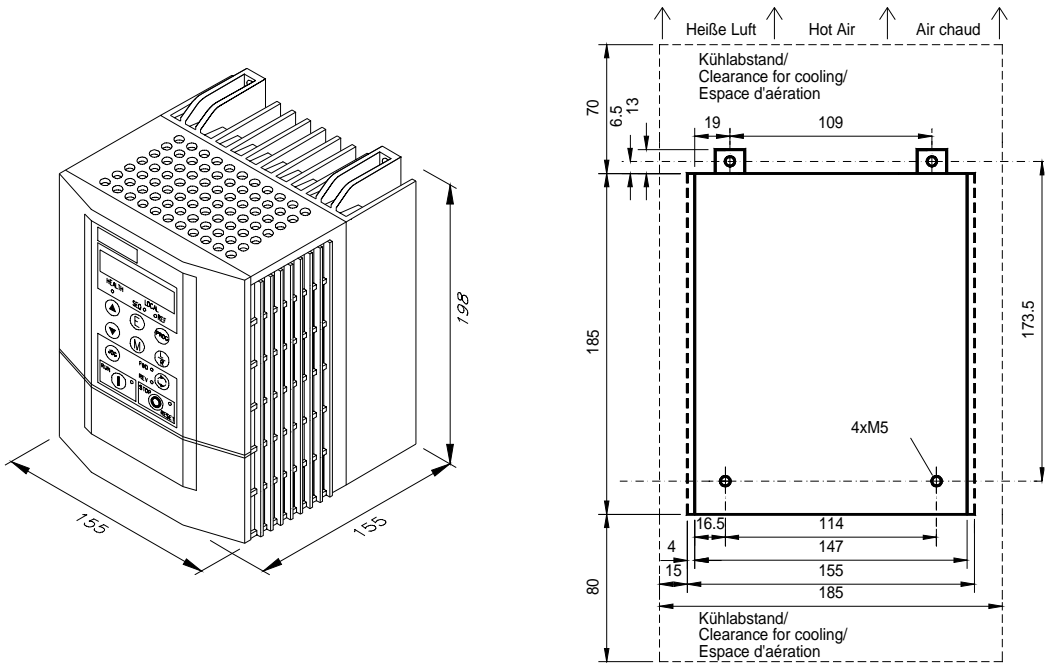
Outline drawing and mounting MM407/415-EMC
